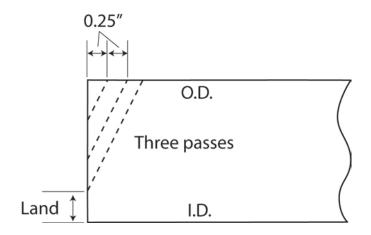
The diagram shows a straight bevel using multiple passes. Set the tool holder depth about 1/4" further back along the pipe O.D. for each pass.
